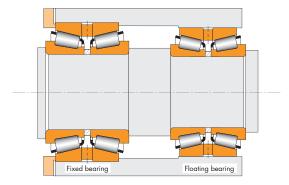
Double-row bearing arrangement assembled with loose fit.
